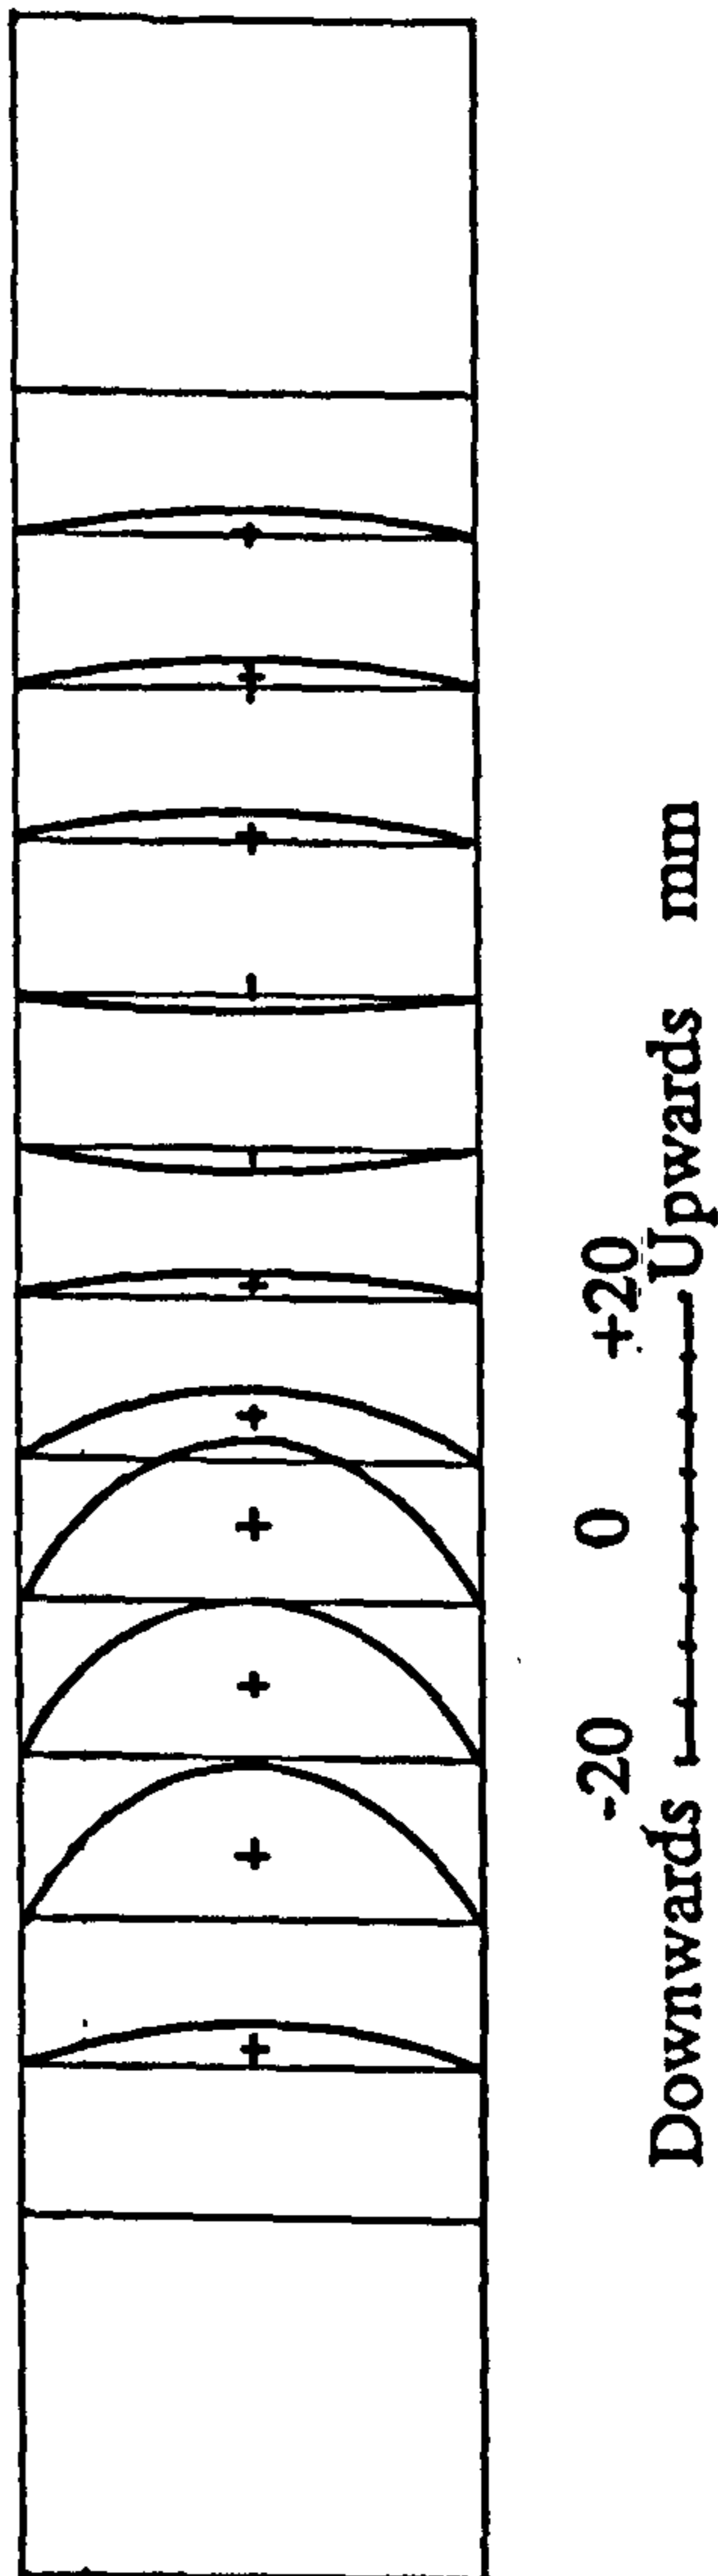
Deformation of cross-beams of the Welding Institute test
